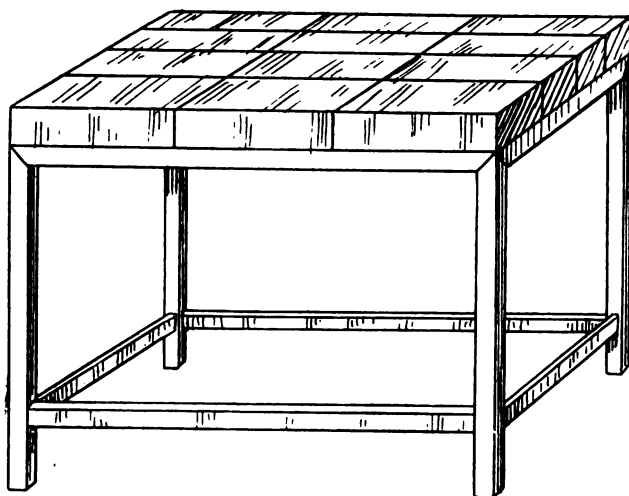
WELDING TABLE WITH FIRE-BRICKS.
